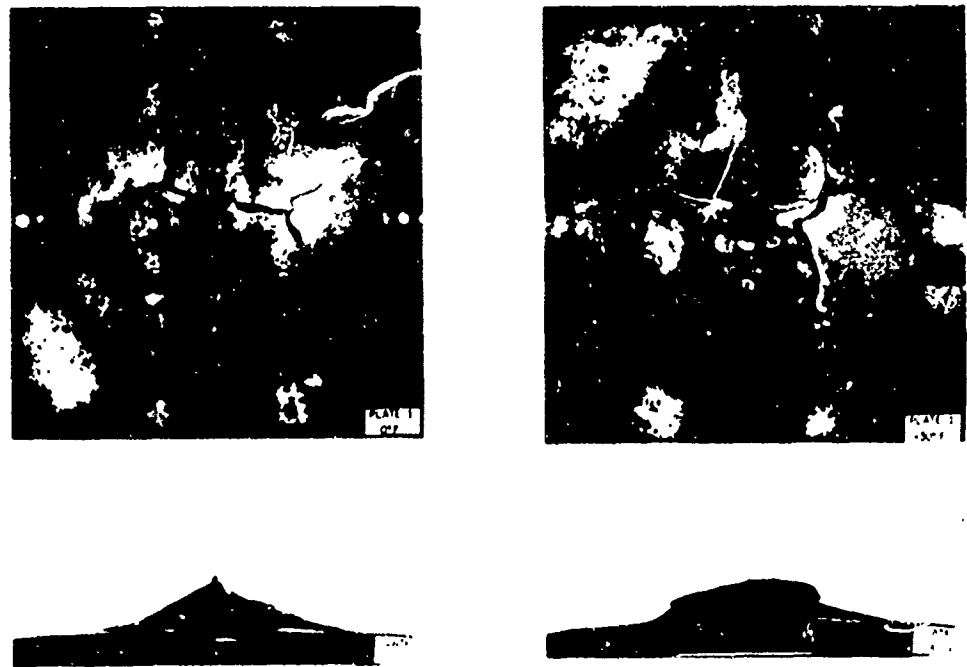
Explosion Bulge Plates from SAW-65Kj Weldment
